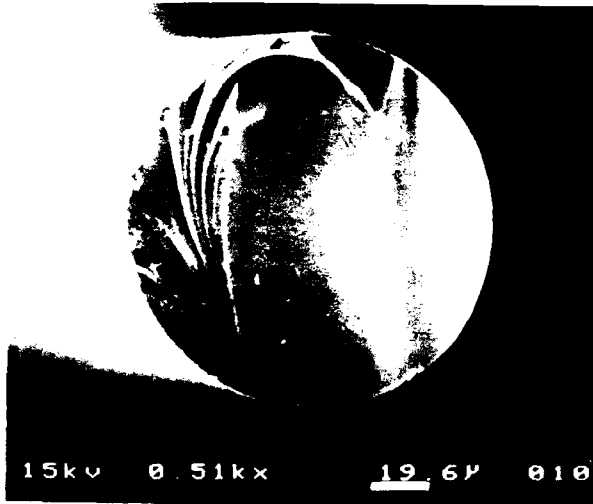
Fracture Surface of a Optical Fiber Subjected to Torsional Loading
